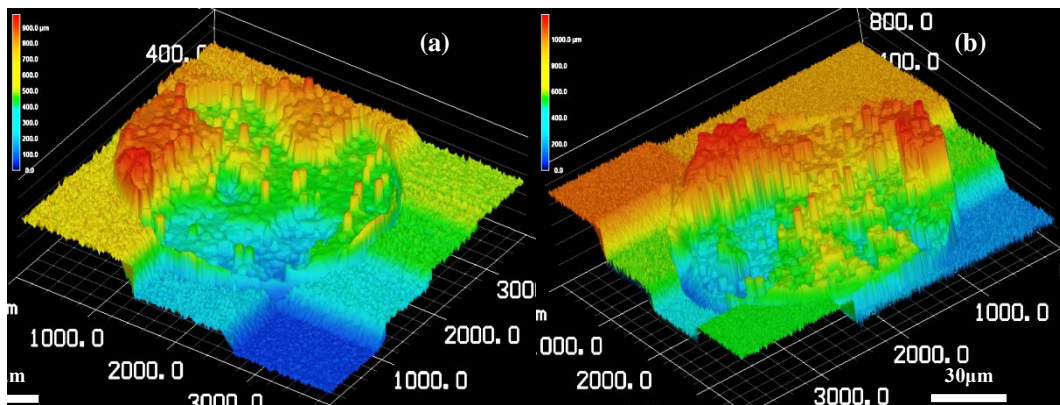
the macro-morphology of tensile fracture with laser confocal microscopy (a) sample 1 and (b) sample 2
